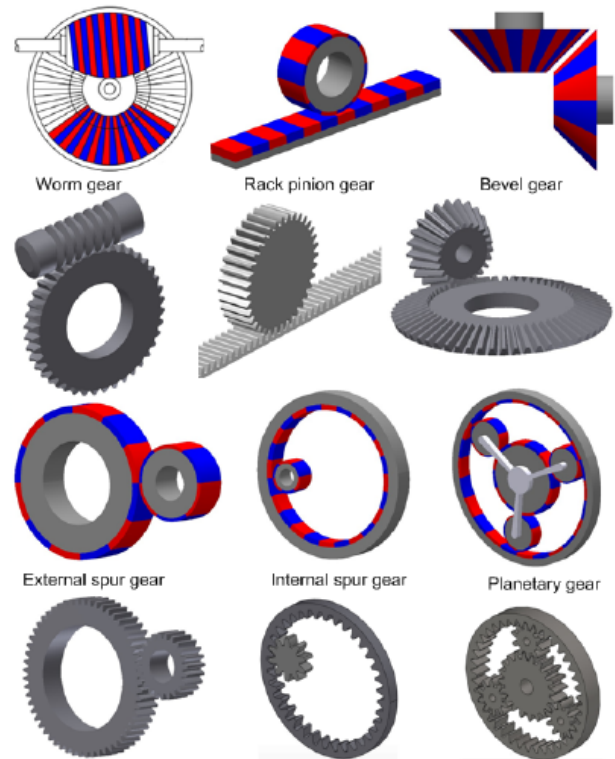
Corresponding gear topologies between mechanical and magnetic gears.
